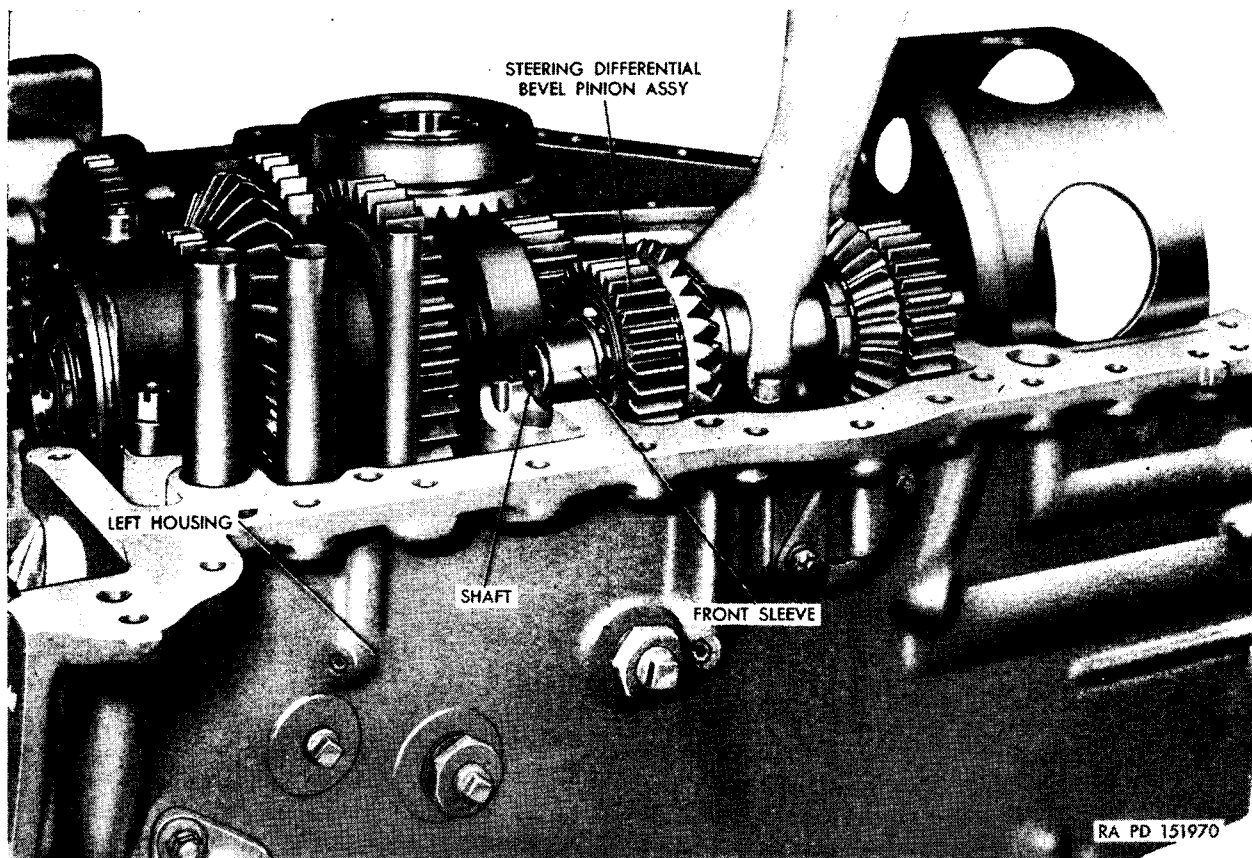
Removing or installing steering-differential-bevel pinion assembly.
